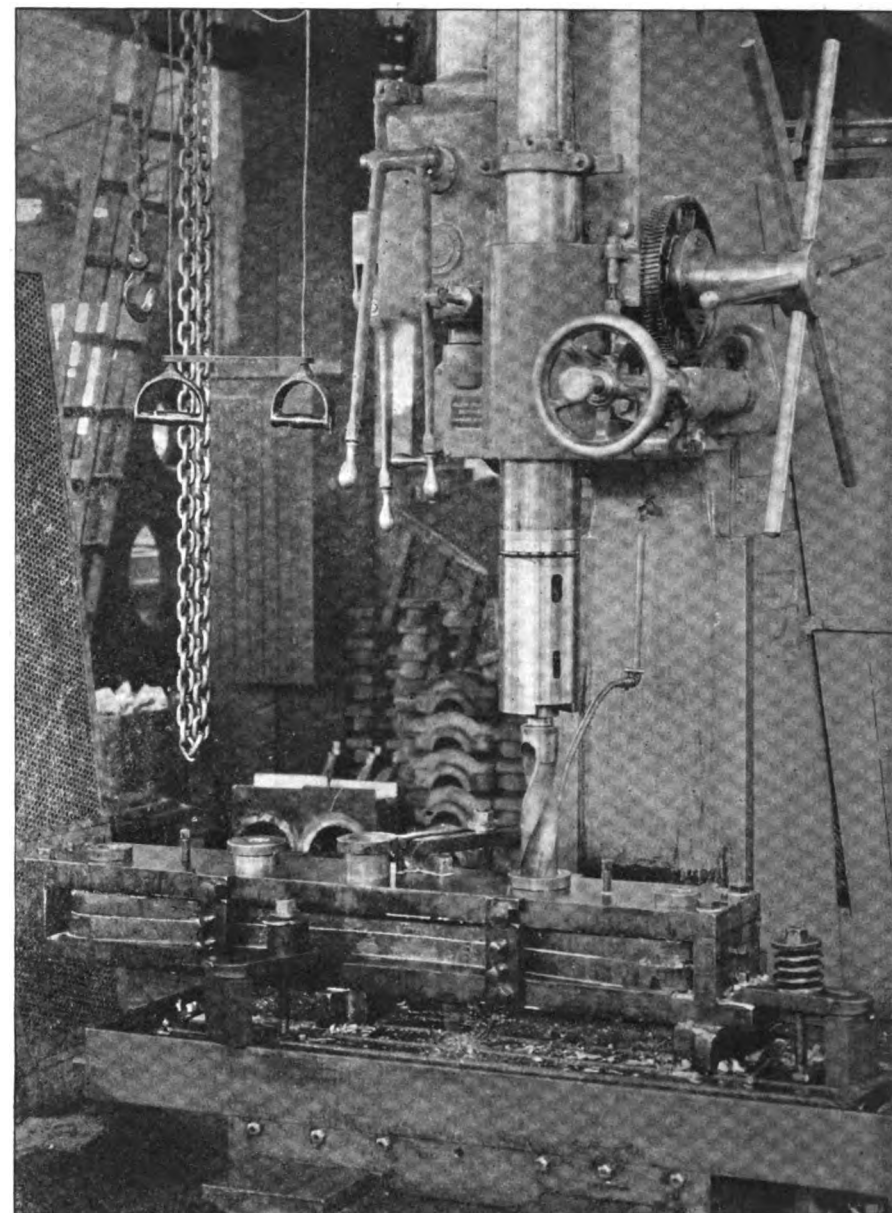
HOW THE HOLES FOR PINS ARE DRILLED IN LINK BARS—A JIG IS USED FOR LOCATING THE HOLES AND TWO BARS ARE DRILLED AND REAMED SIMULTANEOUSLY
